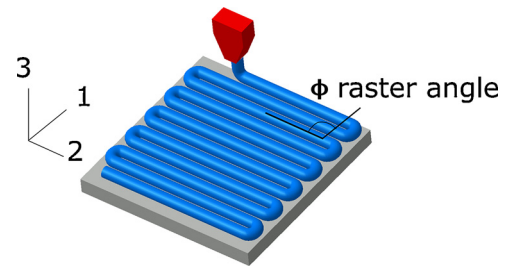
Example of meso-structure of 3D printed parts with raster angle.
